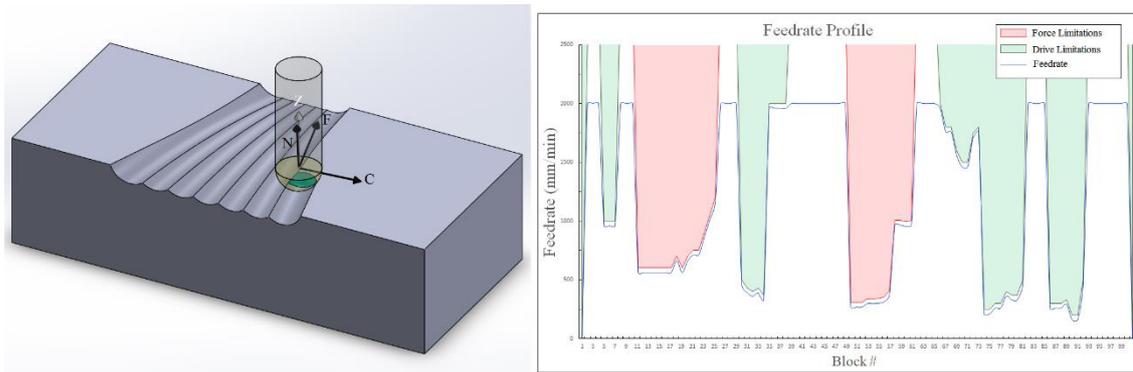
3-Axis Machining (Limited by Feed Drive + Cutting Forces)
